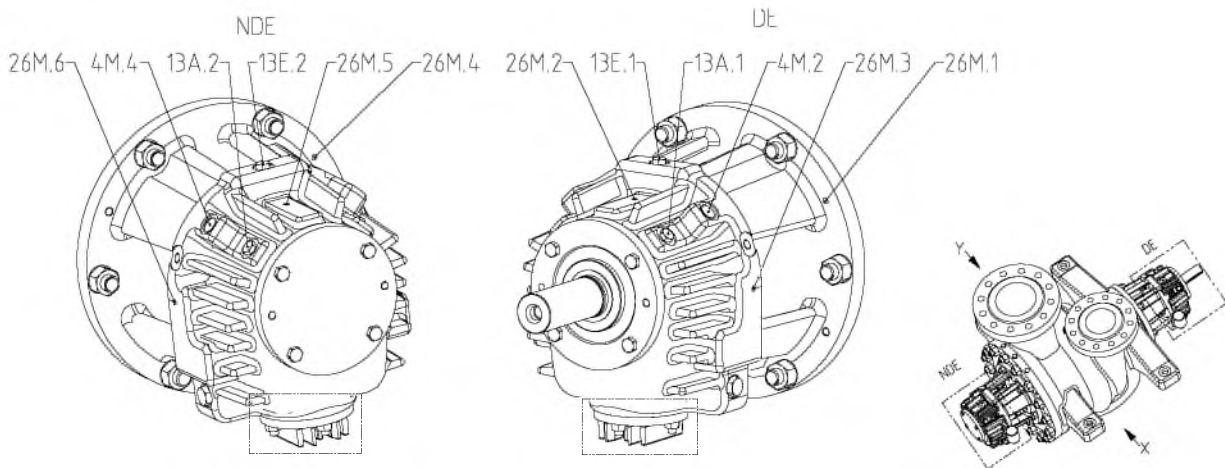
Bearing bracket connections - version with oil mist lubrication, view Y
